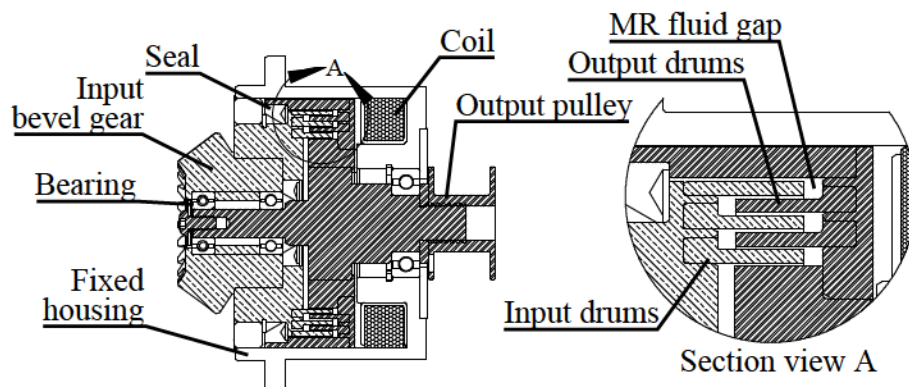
Cross-section view of a MR clutch used in the 2-DOF MR-TDM prototype.
